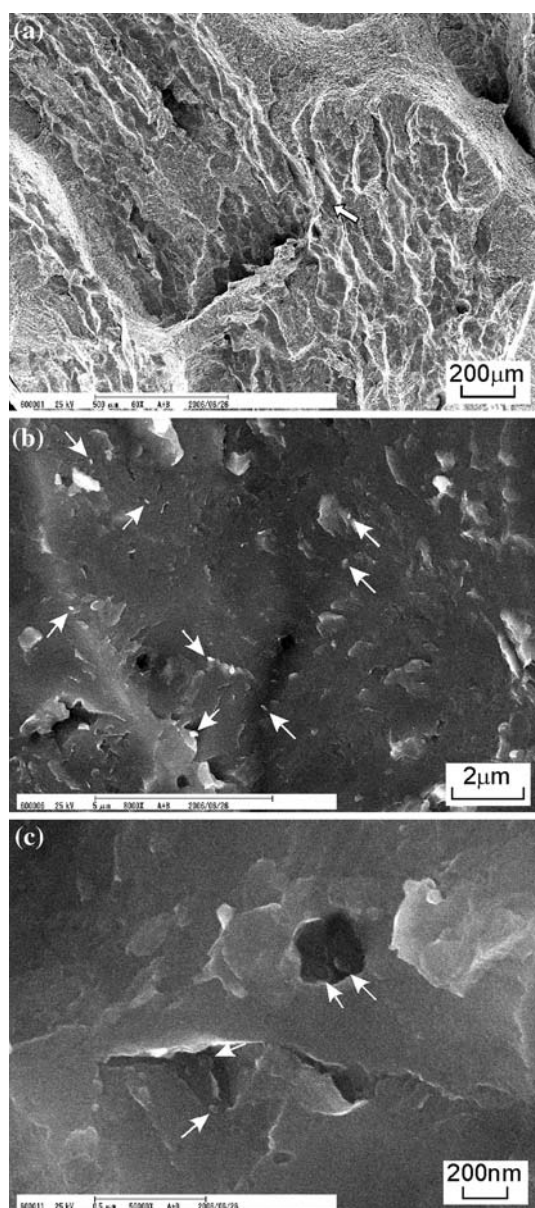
Intergranular fracture surfaces of a specimen reheated at 873 K (charged hydrogen content ~ 4 ppm): (a) low magnification fractograph, (b) enlarged view of the area indicated by the arrow in (a), and (c) magnification of microvoids observed on the fracture surface
